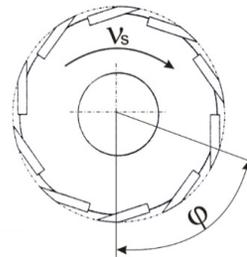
Grinding fluid outflow angle ϕ in method using *T-Tool-Profil* grinding wheel [21]
